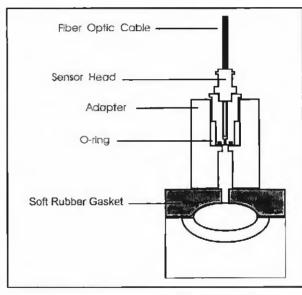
Design for prototype diffusible-hydrogen weld sensor with soft rubber gasket.
